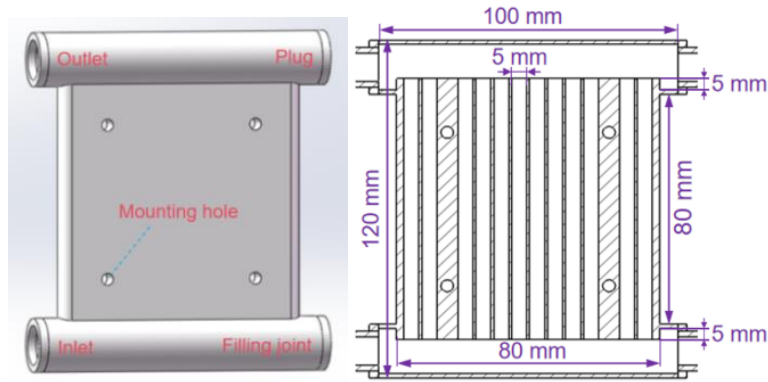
Mini-channel evaporator (a) model (b) dimensions
